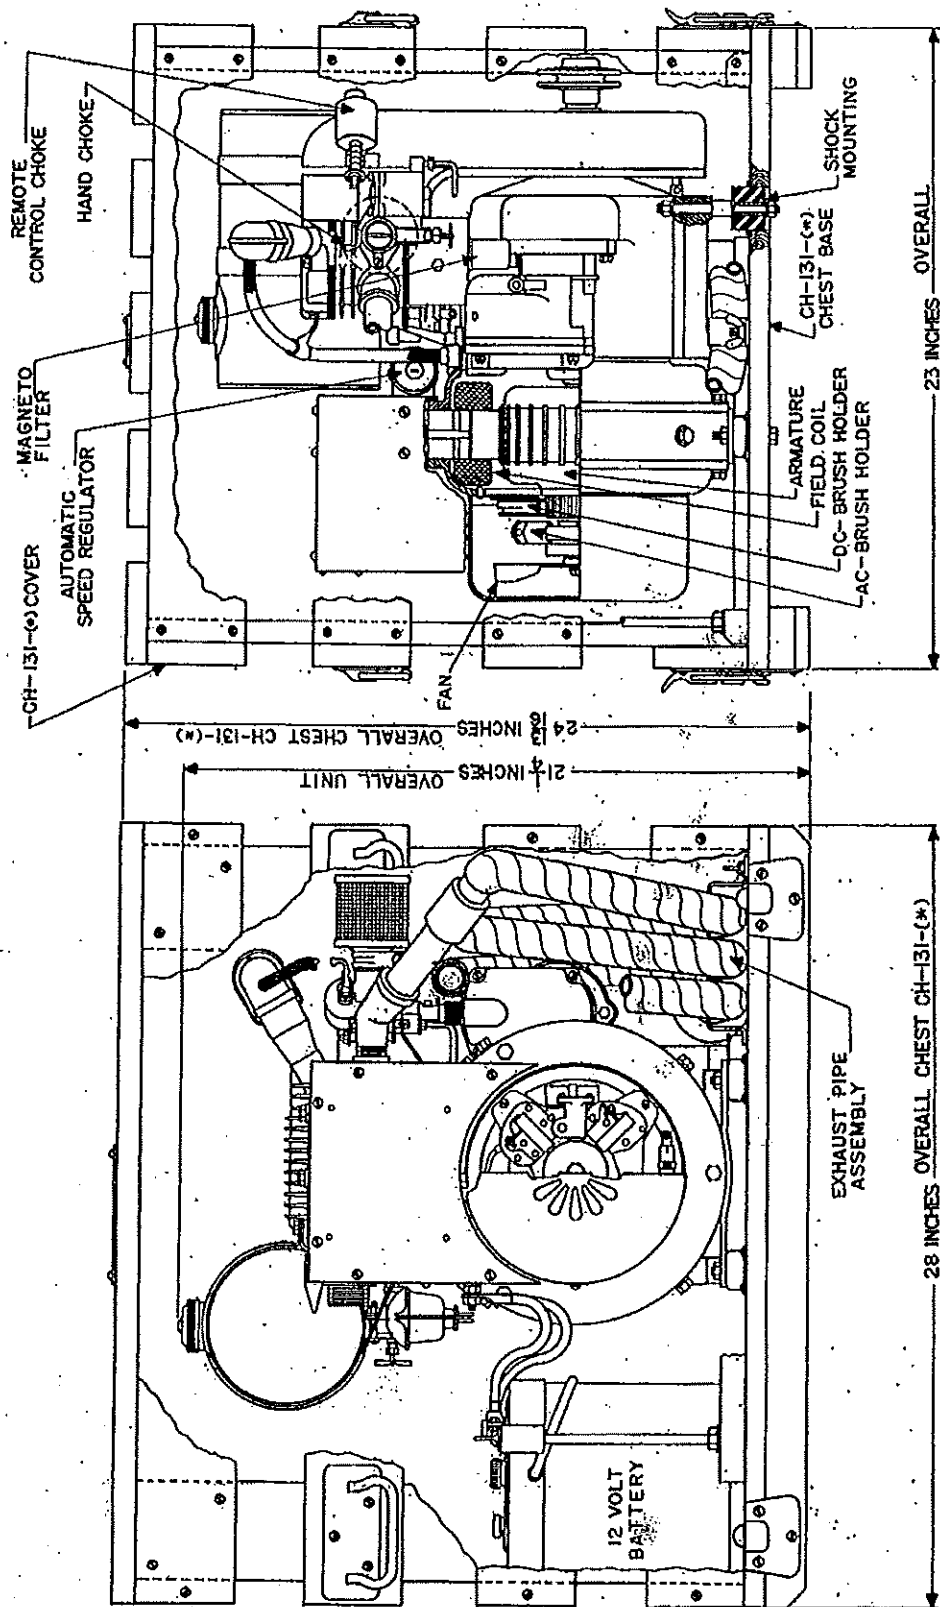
Power Unit PE-108(*) Dimensional Sketch.
